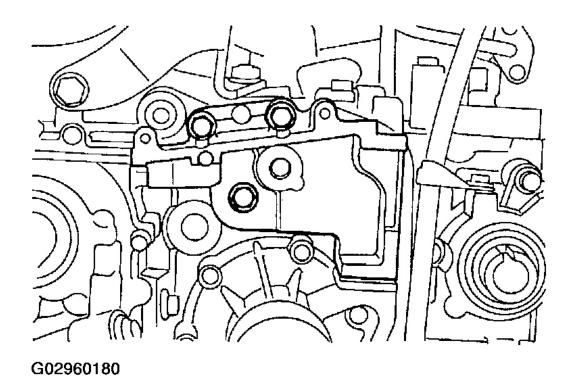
Installing Tensioner Bracket Courtesy of SUBARU OF AMERICA, INC.
